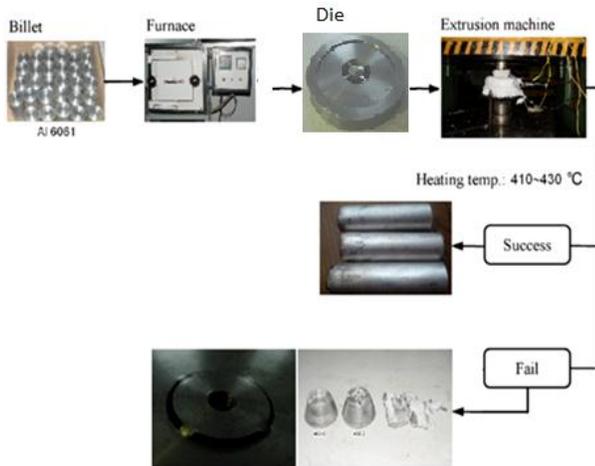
Processing of hot extrusion of Al 6061 alloy tubes using porthole-die
